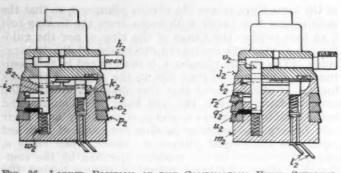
Locked Position of the Combination Fixed Steering-Wheel Lock
